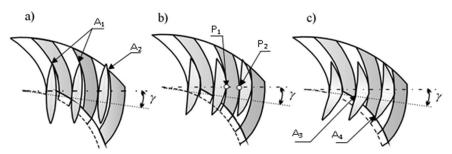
Possible types of traces marked by cutting tool edges with blade profile angles: a) symmetrical, b), c) skew
